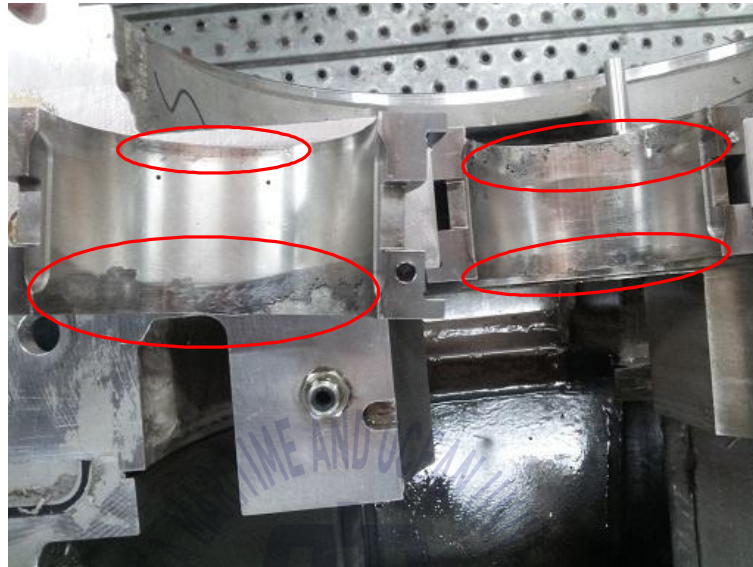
Damage of input shaft upper & lower bearing surface by extended crack
